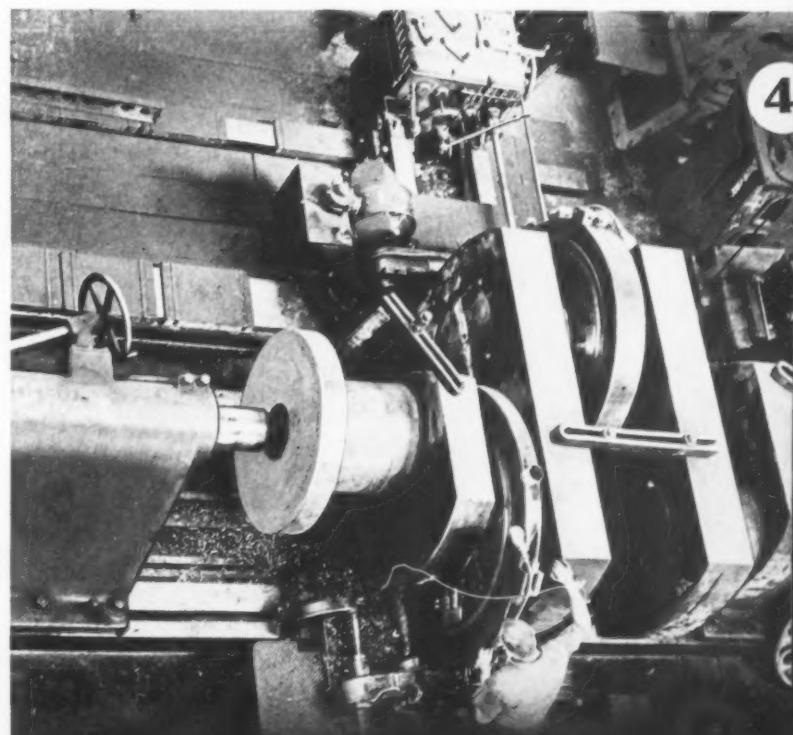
Two Crankpins of Each Crankshaft Section are Simultaneously Finish-turned in This Niles Machine by Two Tool-heads Revolving around the Stationary Crankpins
